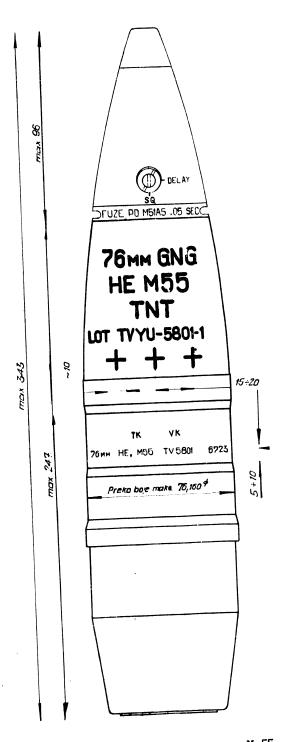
HIGH EXPLOSIVE SHELL »HE M 55 «
